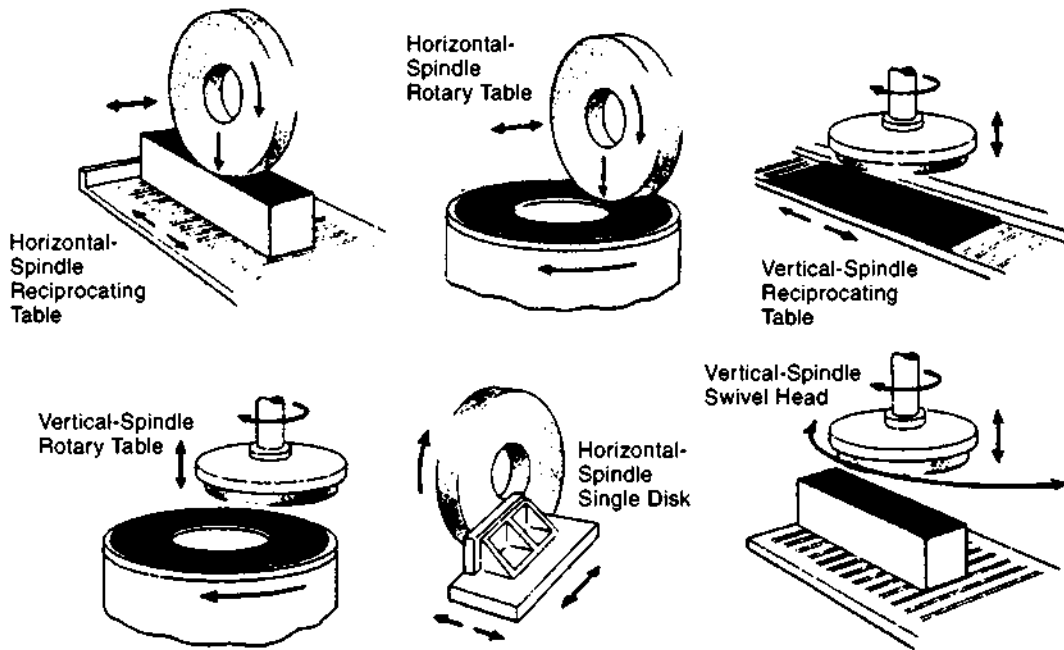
C3 Various equipment arrangements for grinding flat surfaces. (Courtesy American Machinist, Penton Media, Inc.)
